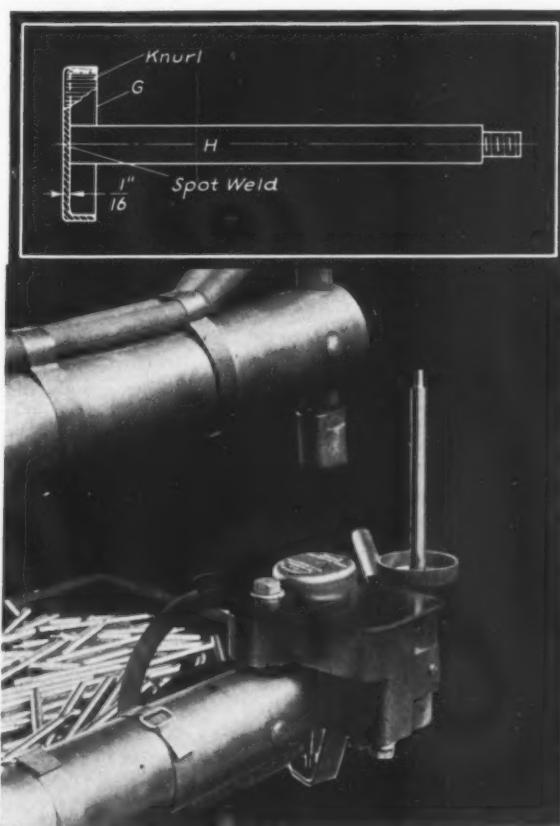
By designing this part for spot welding, material required is reduced to minimum
